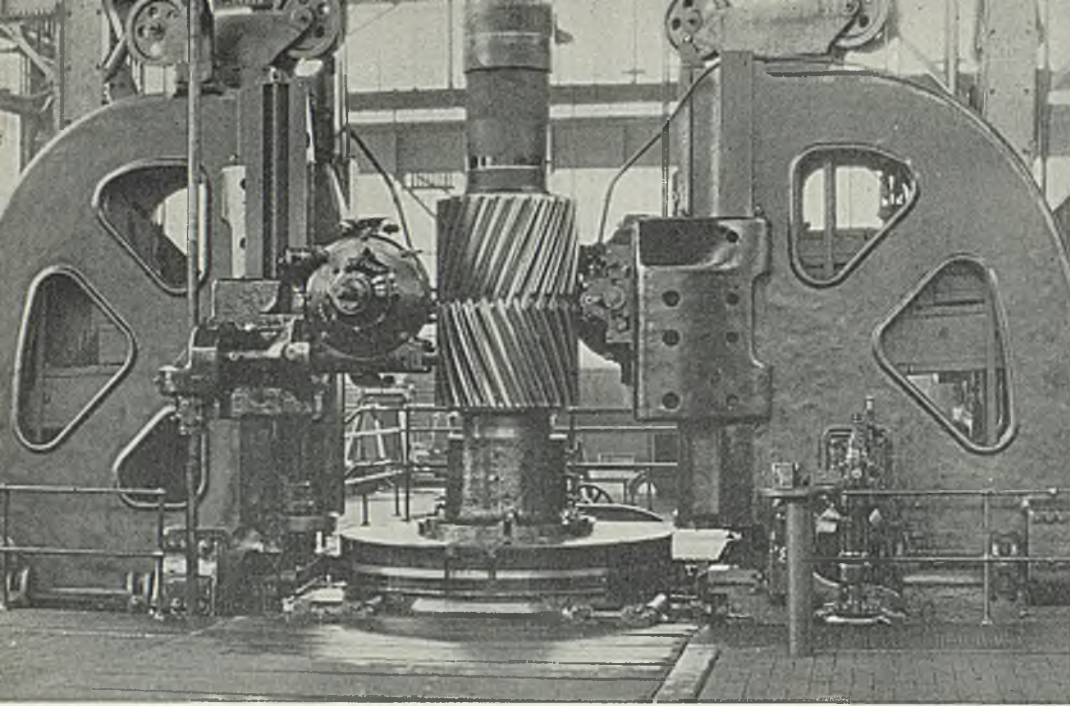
Cutting a heavy steel mill pinion. This gear hobber is used when heavy cuts must be taken and the machine is subjected to considerable strain
